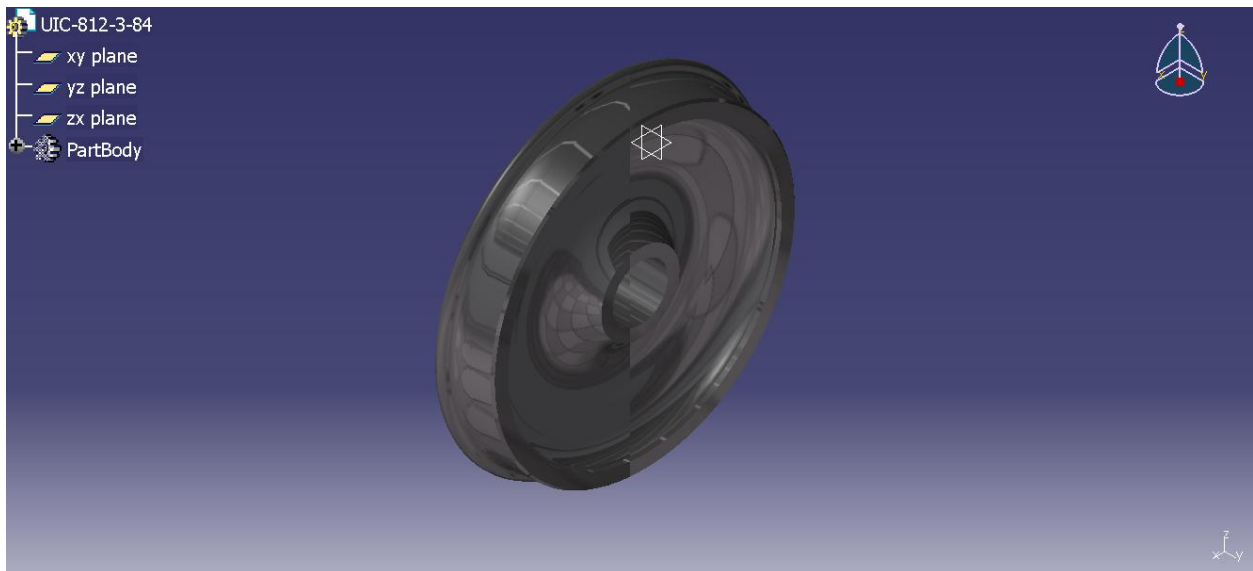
Part drawing of UIC-812-3-84 standard wheel.
